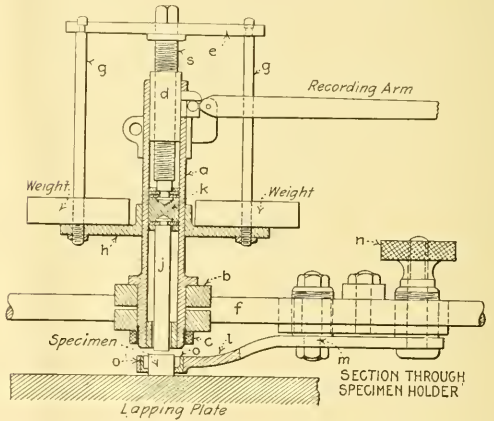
SECTION THROUGH SPECIMEN HOLDER
